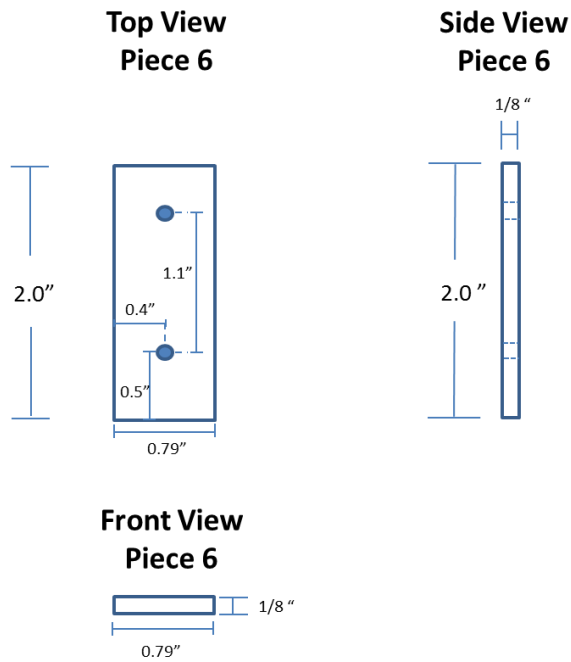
Schematic of piece 6 for motorized stage fixture.
